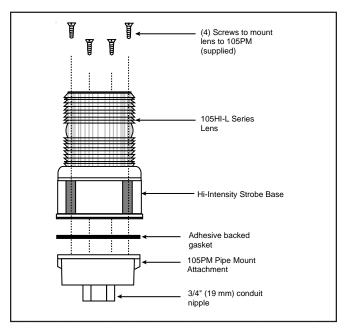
Securing the 105HIST Beacon to the Mounting Attachment (Pipe Mount Attachment shown)
